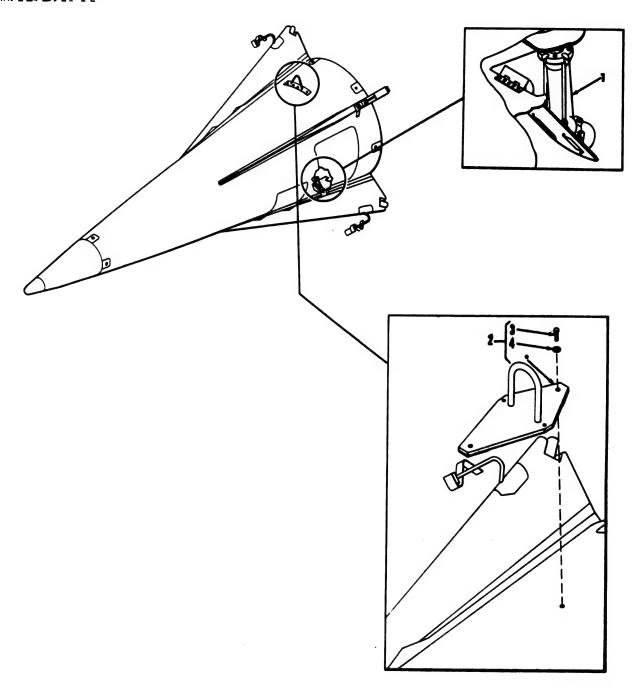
RODY ASSEMBLY, FORWARD /8530475 AND 9979608/
